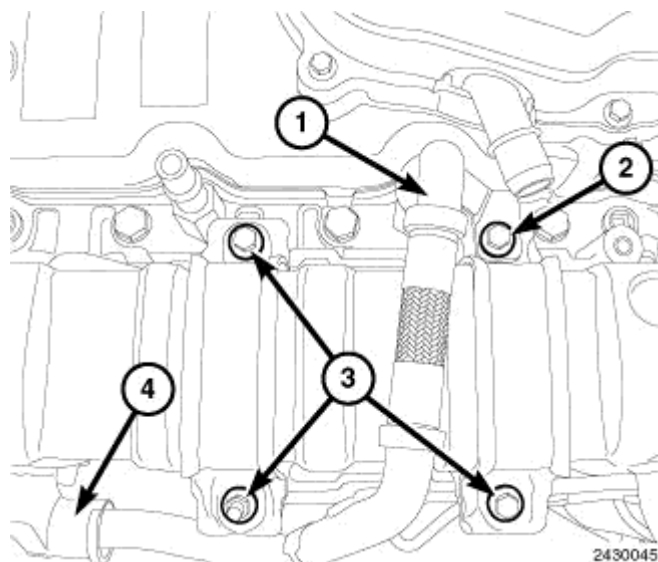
Forward Coolant Tube & EGR Cooler
